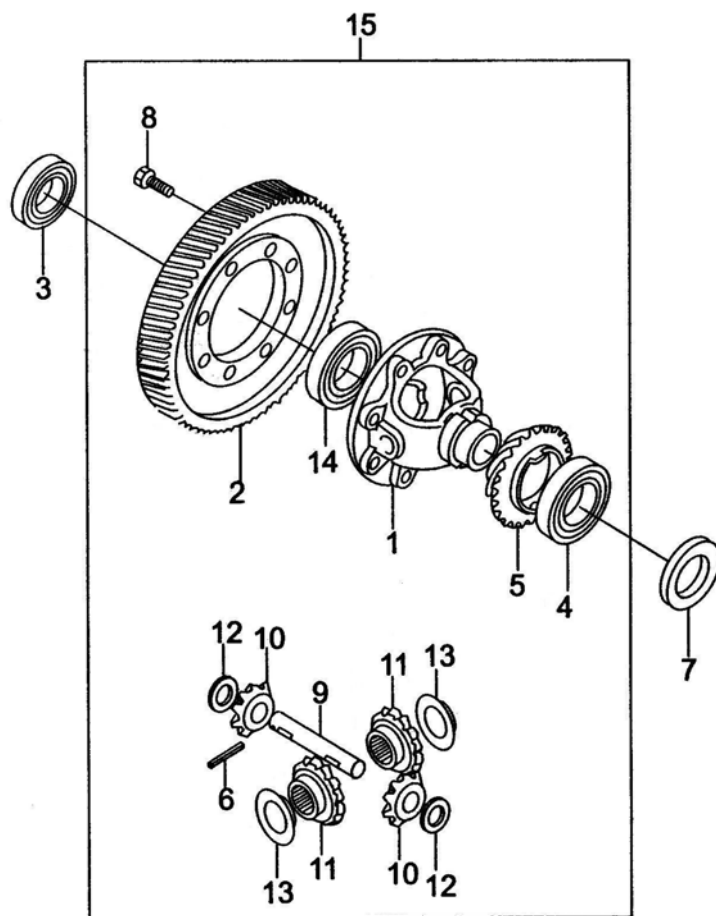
Transmission assembly(five gear) – differential assy.
